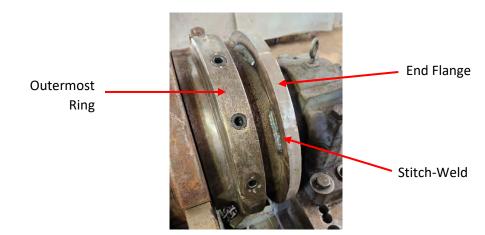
End Flange Stitch-Welded to Neighboring Ring
